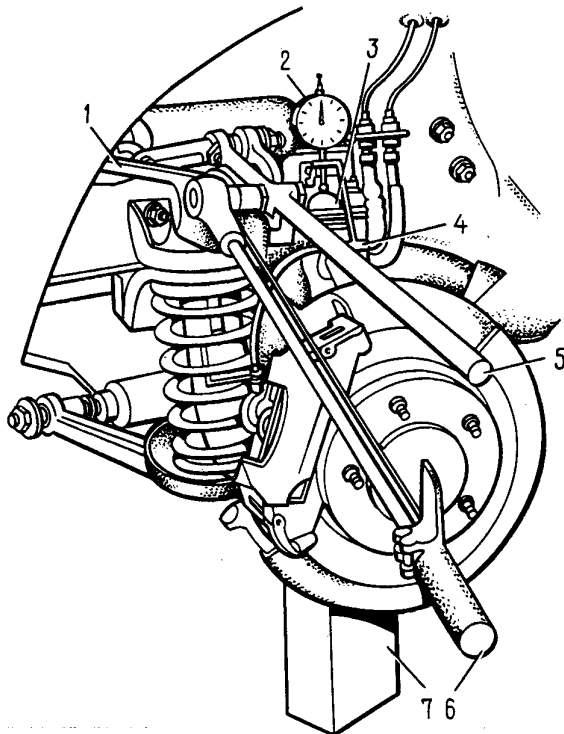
On-Car Checks of Clearance in Suspension Upper Ball Joints:
